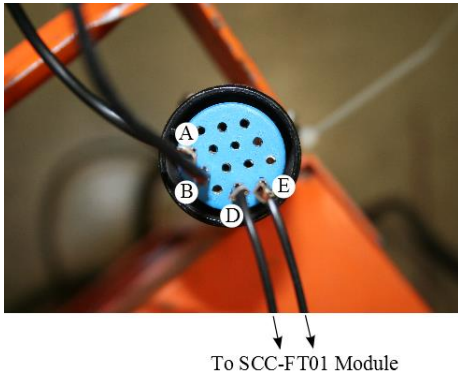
Photograph of the wire connections on the end of the welder remote control wire.
